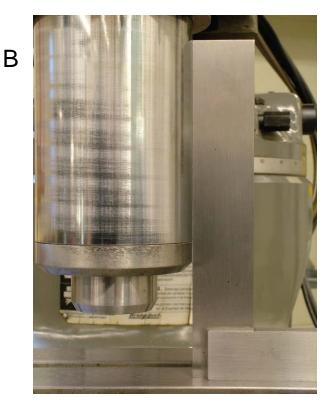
After loosening the head clamping bolts, move the head to set each protractor to its "0" mark. Then tighten the clamping bolts just beyond finger-tight. © Cengage Learning 2012
